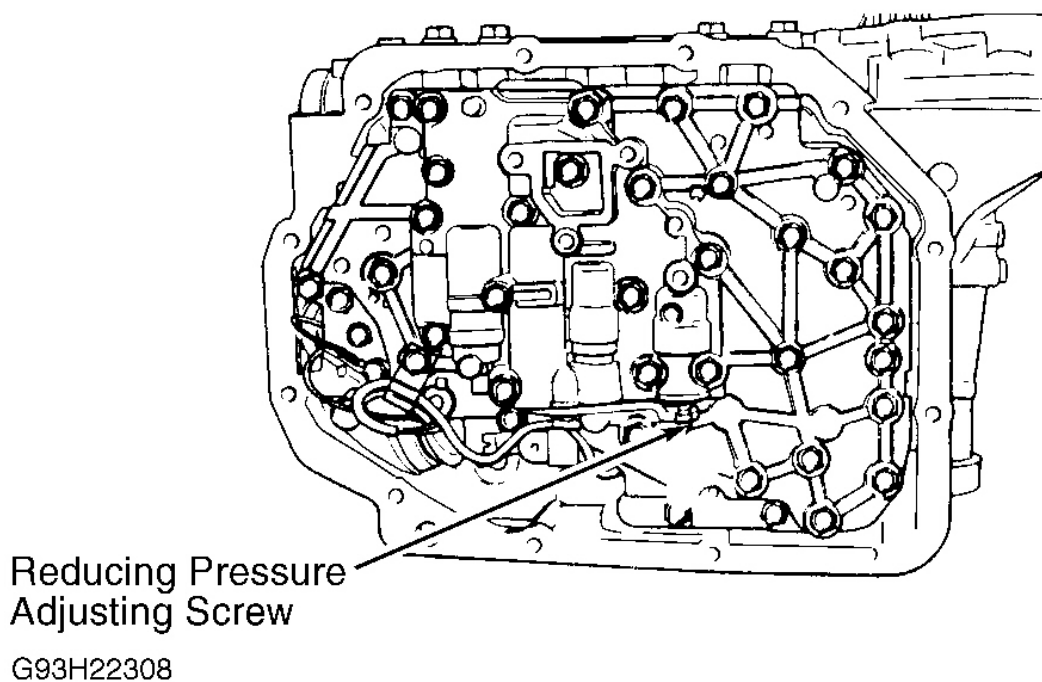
Identifying Reducing Pressure Adjusting Screw
